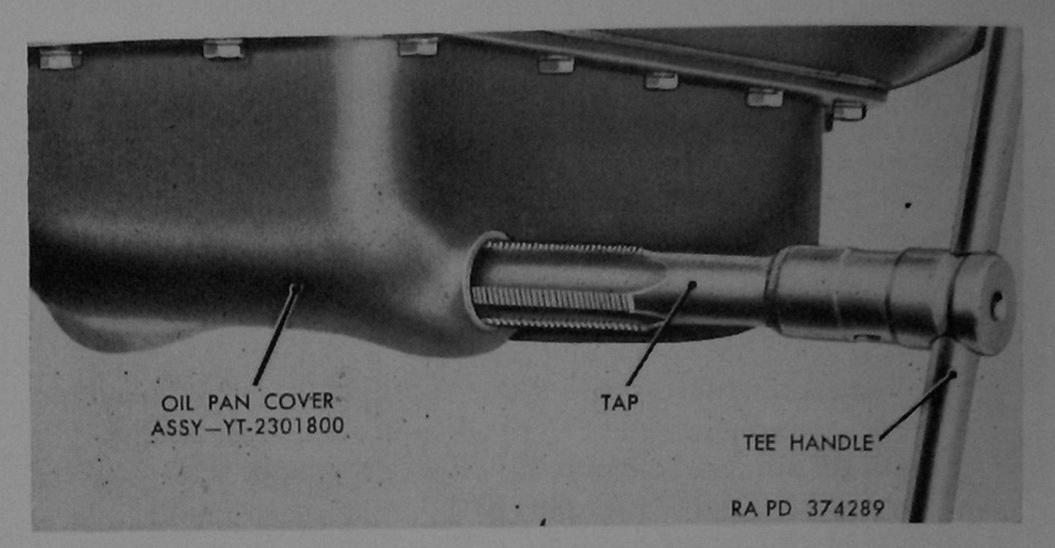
Using special tap 8720299 to clean up threads in oil pan drain plug hole
